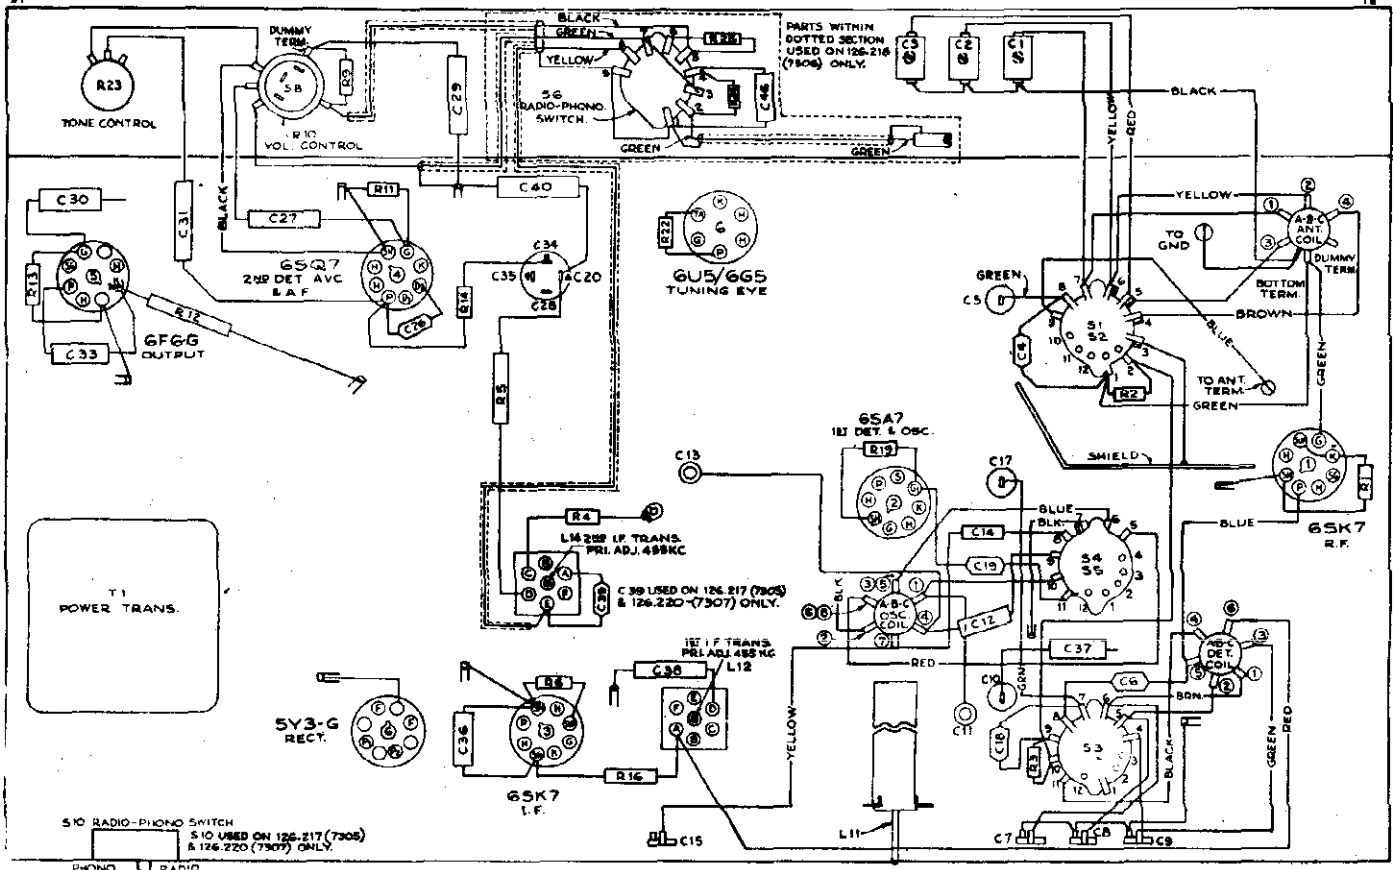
TUBE, TRIMMER AND PARTS LOCATION—BOTTOM VIEW
